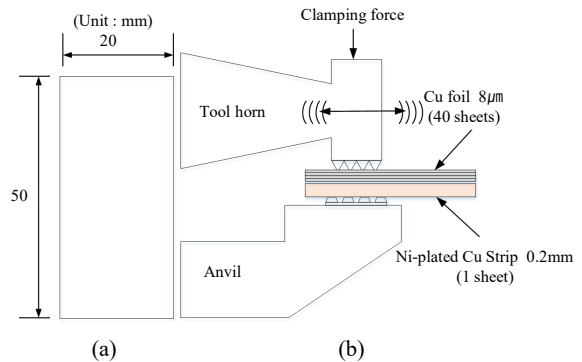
(a) Test sheet size and (b) joint type used in the experiment
